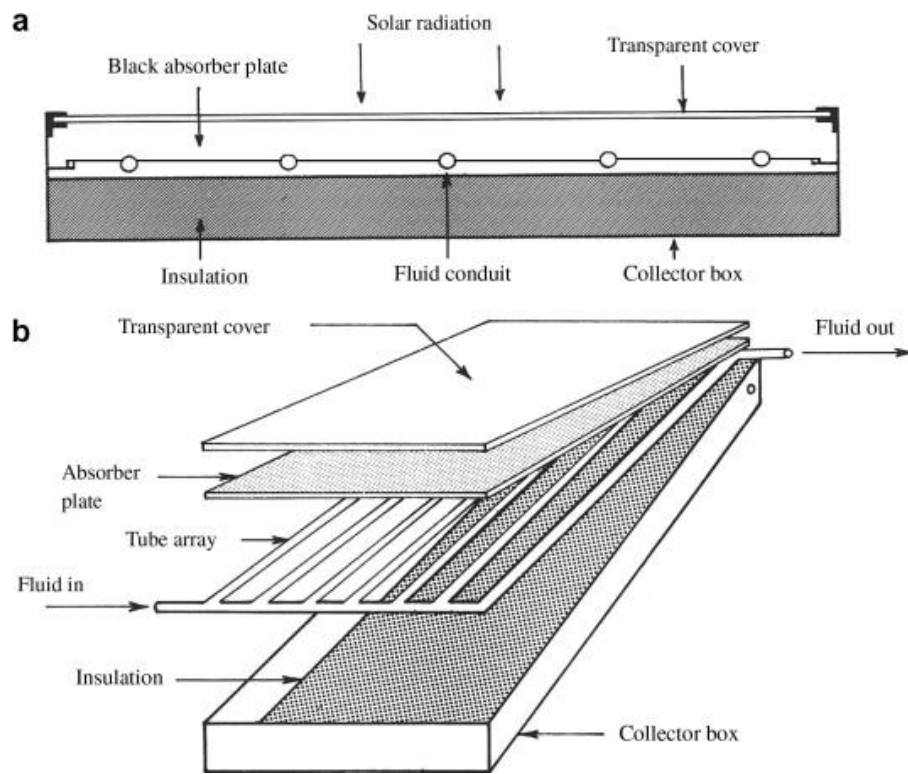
A flat-plate solar collector with disassembled parts.
